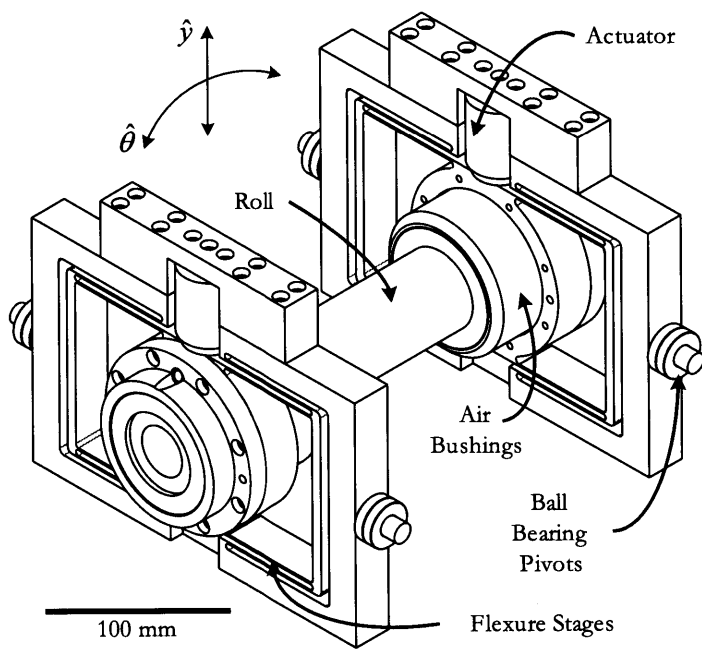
Schematic of complete kinematic stage design. Key mechanical elements are highlighted.
